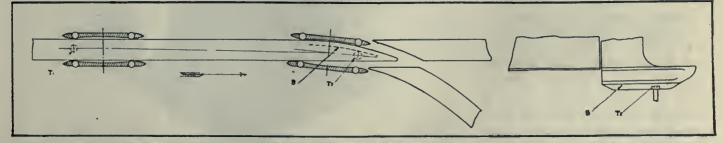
SECTIONAL I LAN AT LEVEL OF LOWER FLANGES OF 1-BEAM TRACK; MAIN ILLUSTRATION SHOWS RIGHT-HAND SWITCH; AT THE RIGHT, TRUCK SIDES OF THE TROLLEY.
